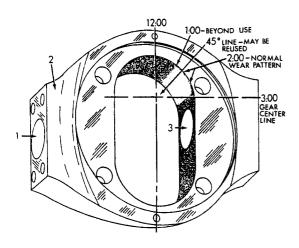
Typical Gear Case Wear Pattern (T-70604)
